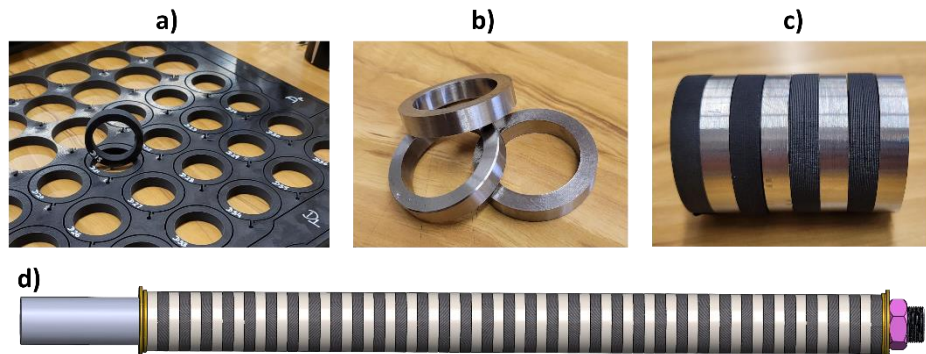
a) CFRP rings machined by abrasive waterjet machining of CFRP plates. b) Ti6Al4V rings c) stacks of CFRP and Ti rings d) Schematic of workpiece rod with alternative arrangement of CFRP (black) and Ti (silver) rings assembled and secured with nut on the shaft.
